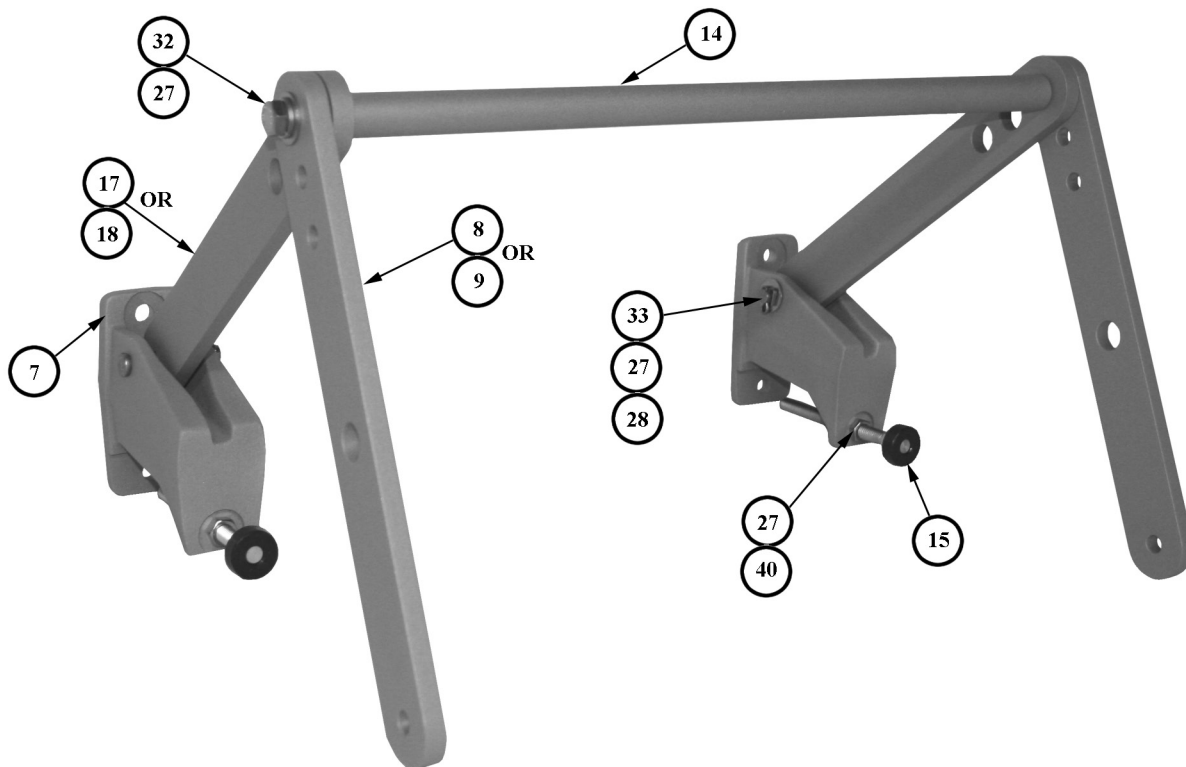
LOWER HINGE BRACKET ASSEMBLY
